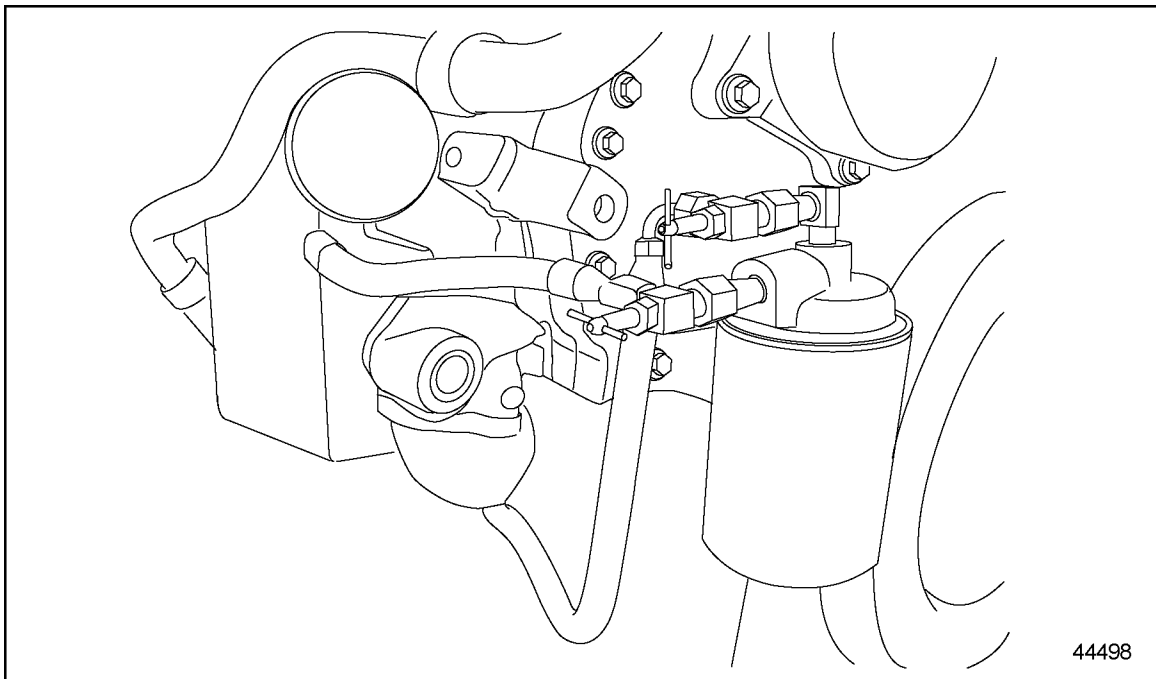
Former P/N: 23529234 Coolant Filter Adaptor Assembly
